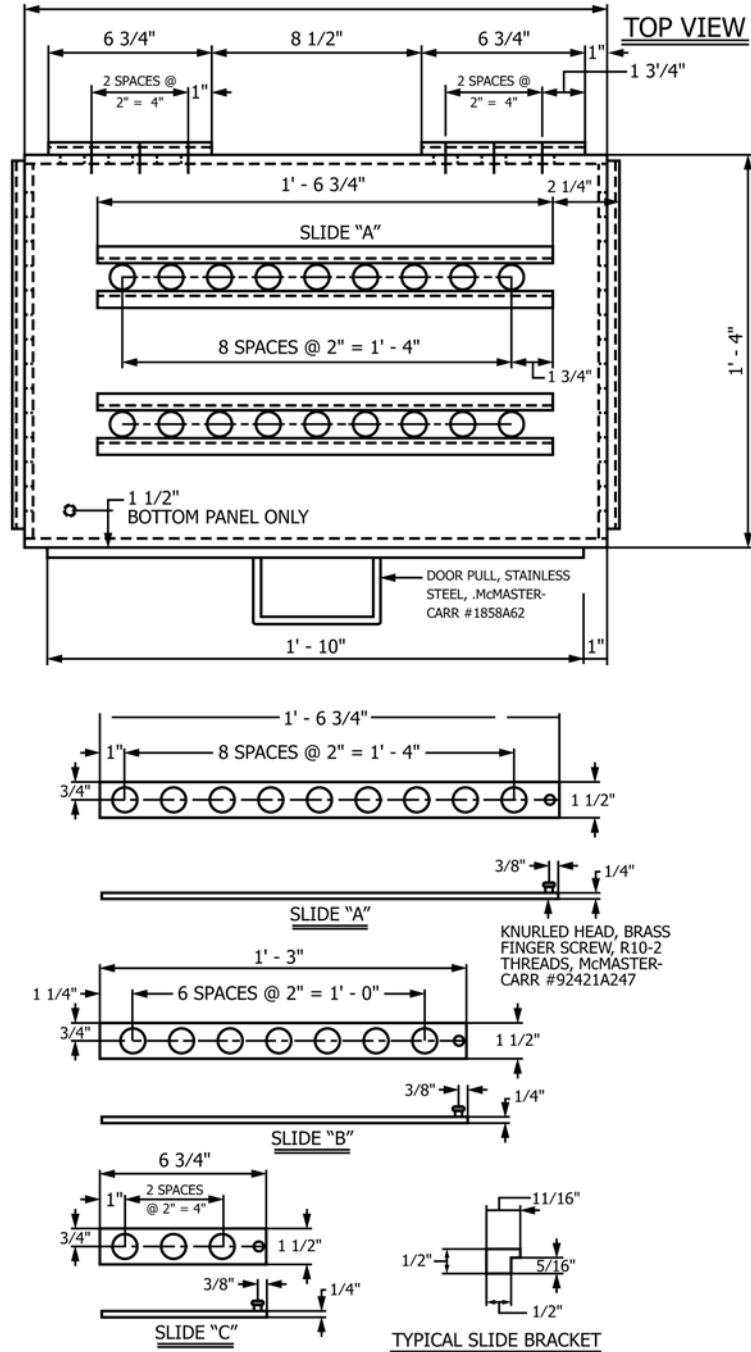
Testing Chamber Drawing — Figure 1b (continued)
